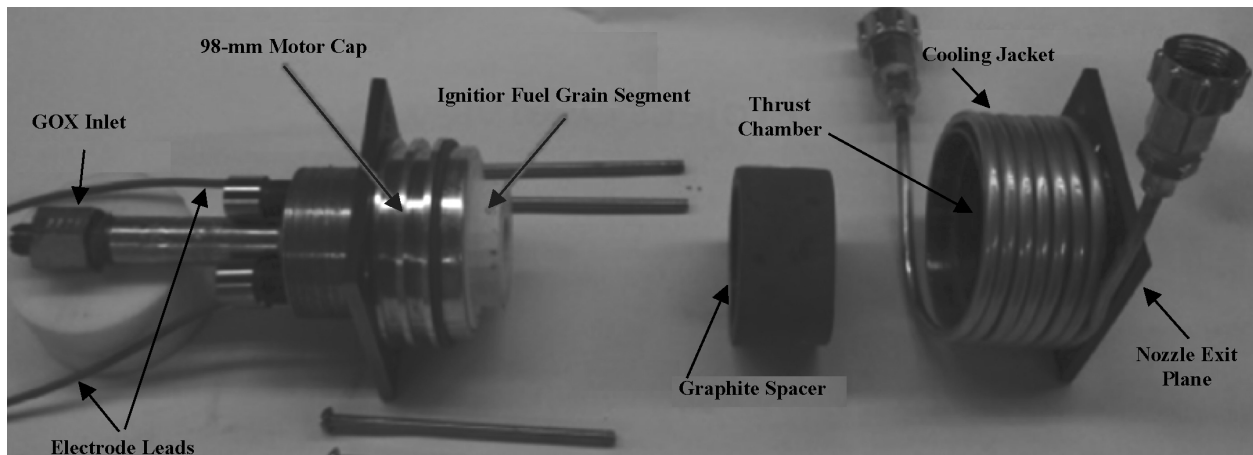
Exploded View of the "Little Joe" Ignitor System Development Motor.
